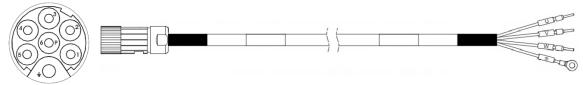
Direct drive motor power cable (HE00841001 D
